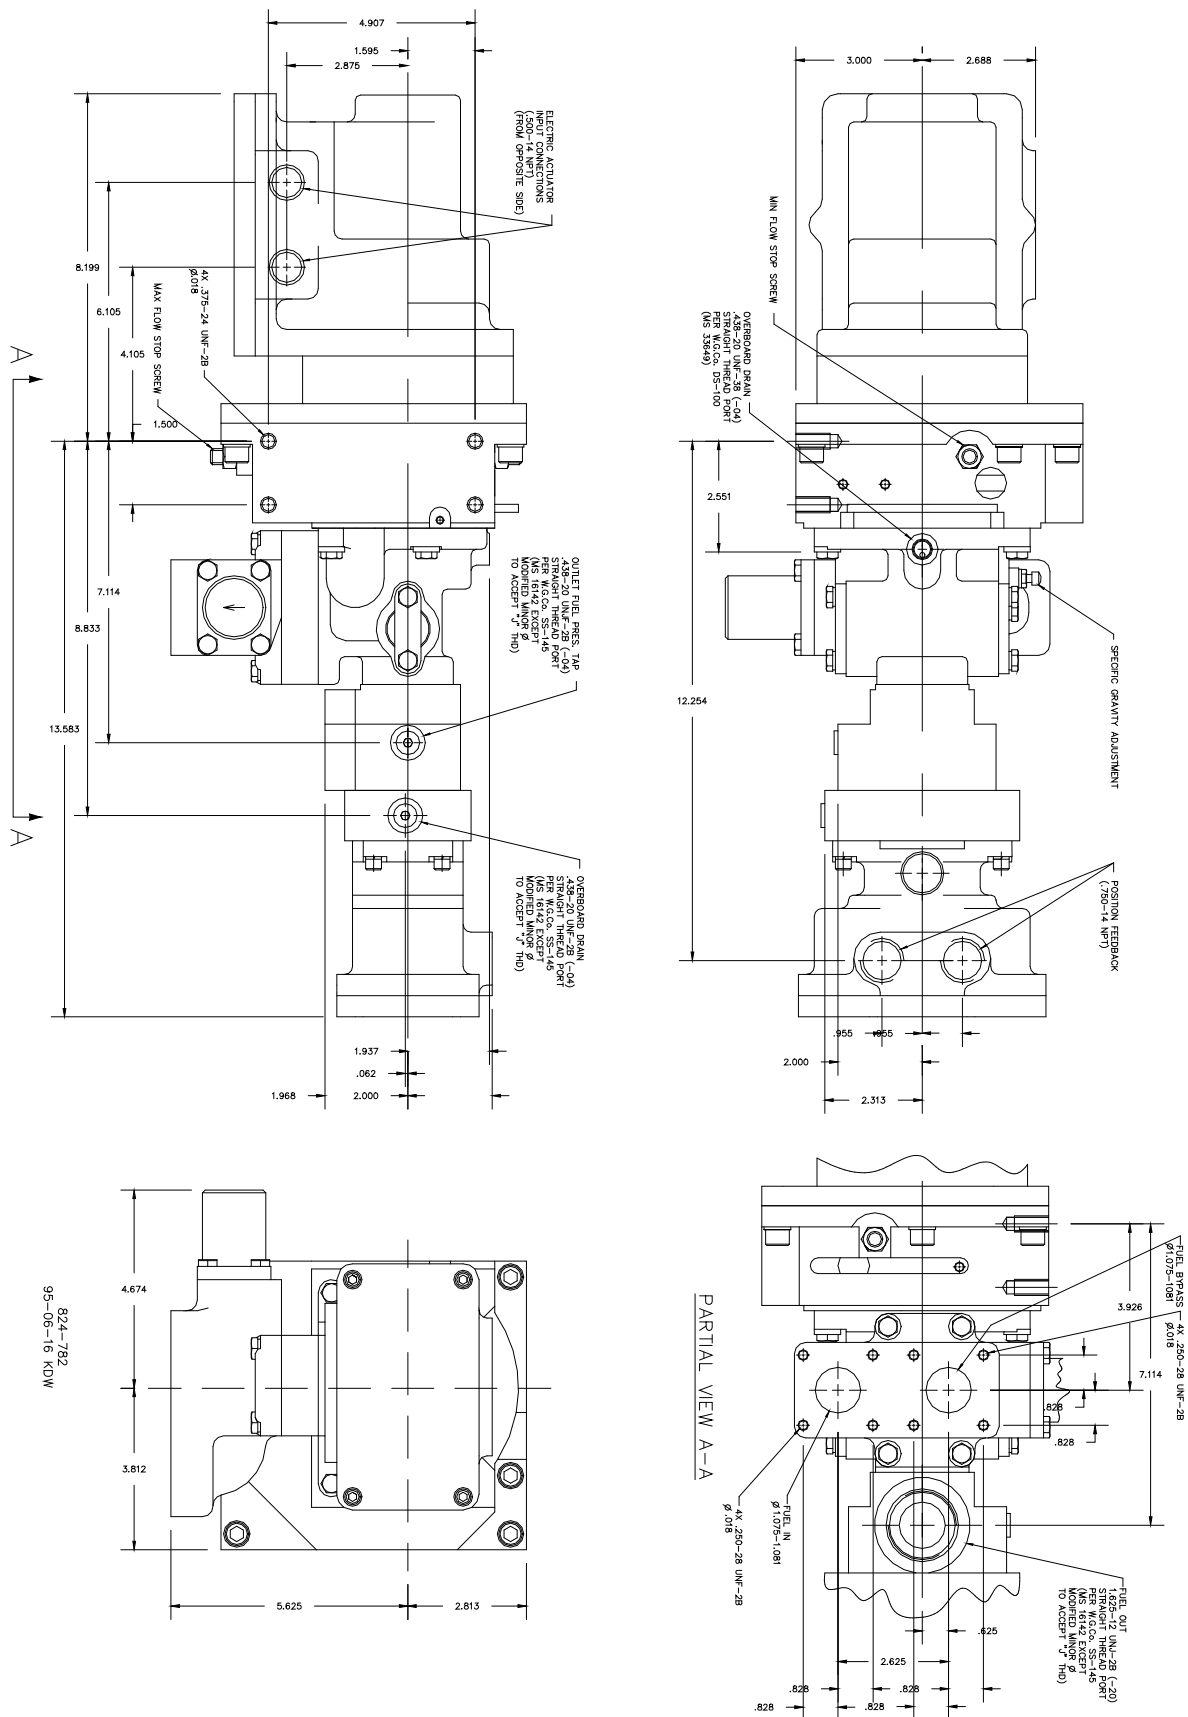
EM-35 Actuator/1907 Large Liquid Fuel Valve Outline Drawing
